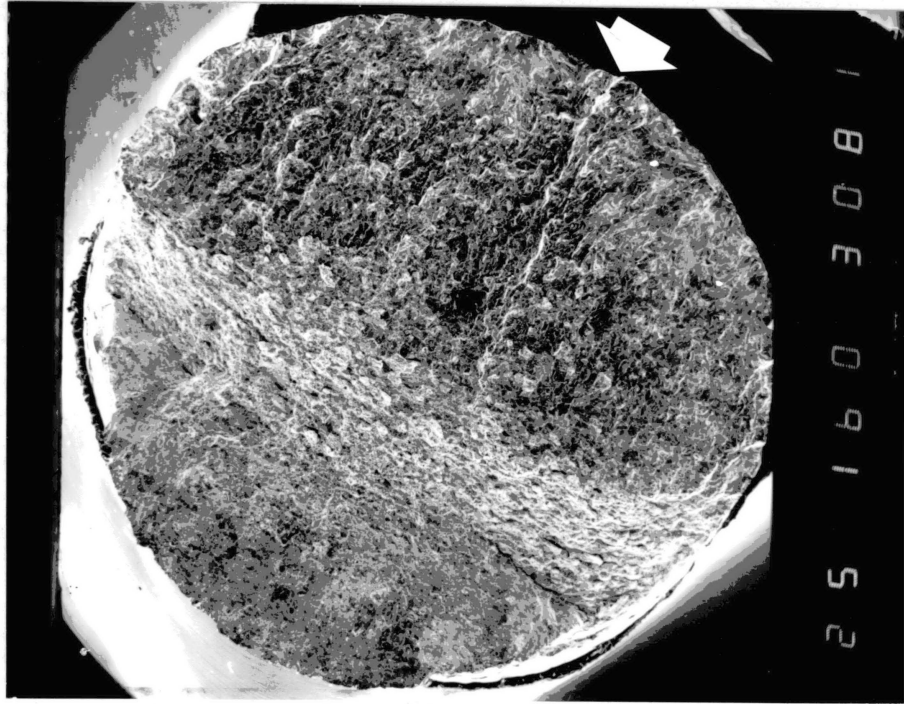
Fracture Surface of Inconel 600 Fatigued in Mercury at 70%
